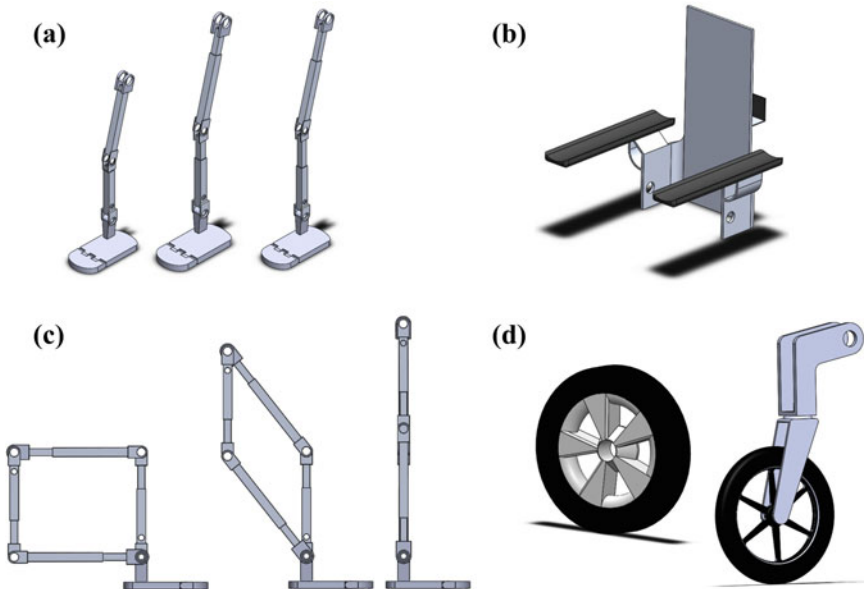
CAD model of a telescoping leg links, b back support, c four-link mechanism and d front and rear wheels
